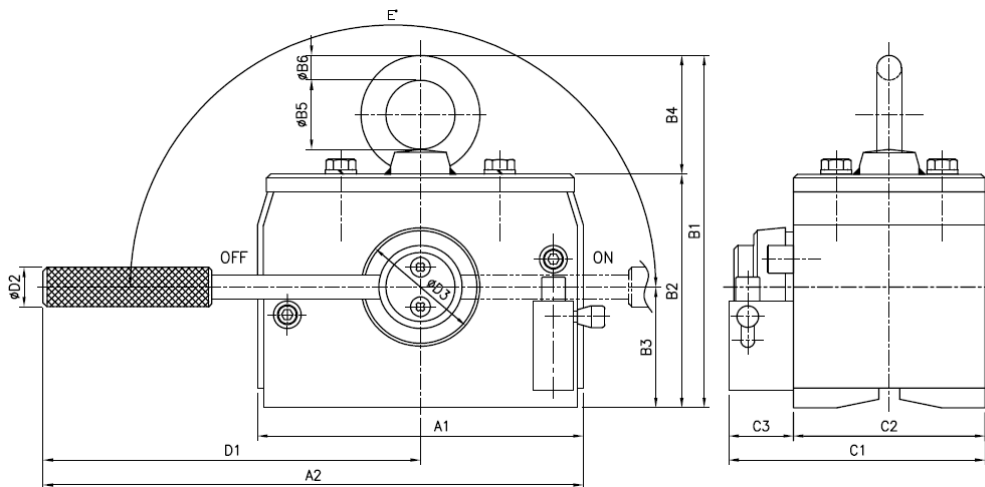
Outline drawing of KRD30, KRD50, KRD80, KRD100, KRD160
